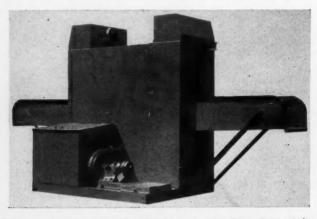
One-Stage Washing Machine for Washing Rear Axle Shafts in an Automotive Plant. Arranged for push-type tramrail. Machine is "built-up" to rail to eliminate a dip in the track before entering washer.
